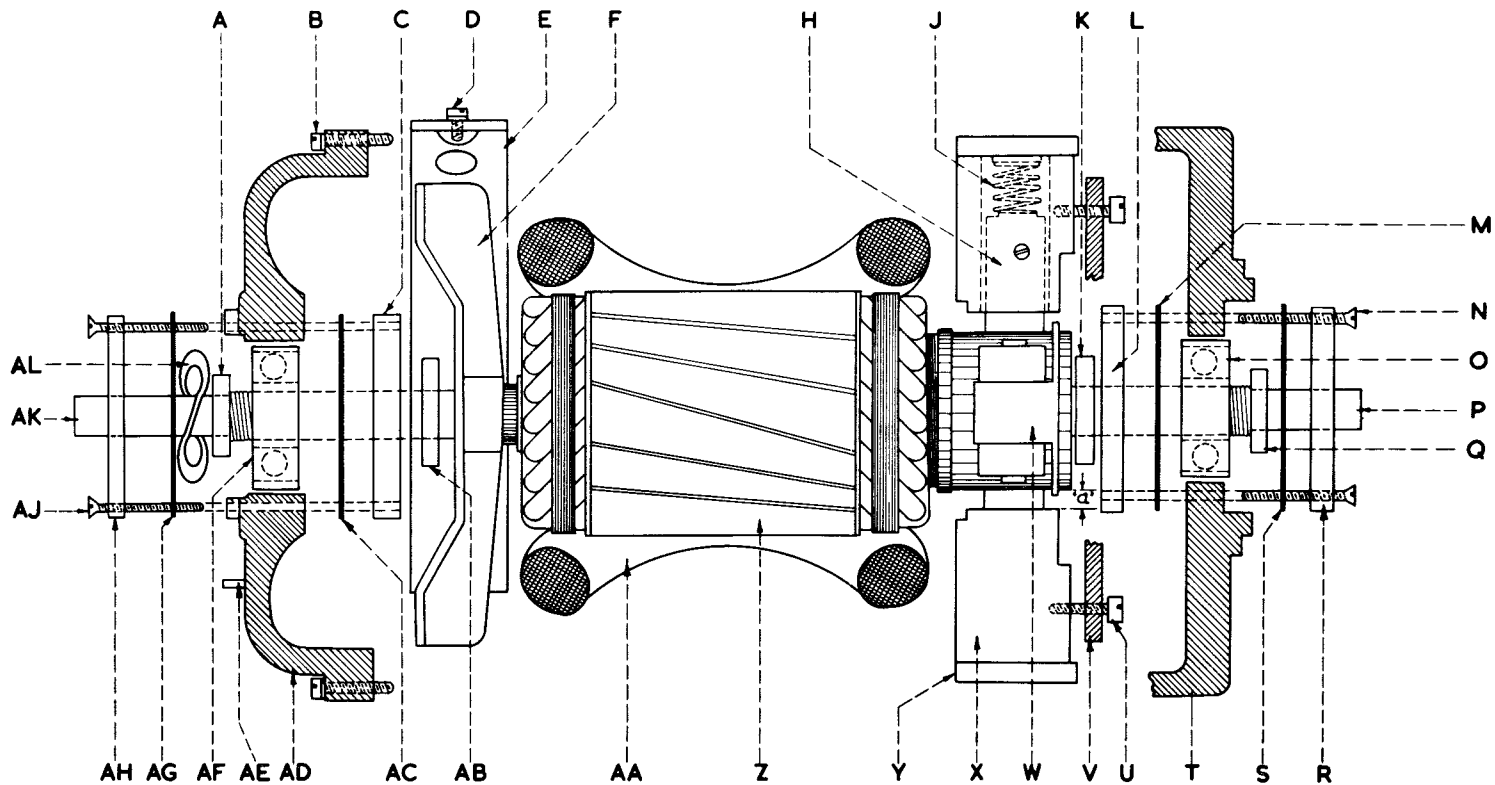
DIAGRAM OF KBF MOTOR DIMENSION
